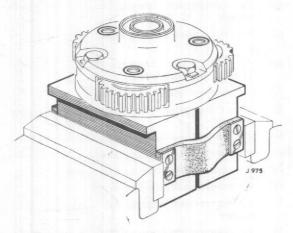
Vice block T.74821, with planet gear assembly installed.
